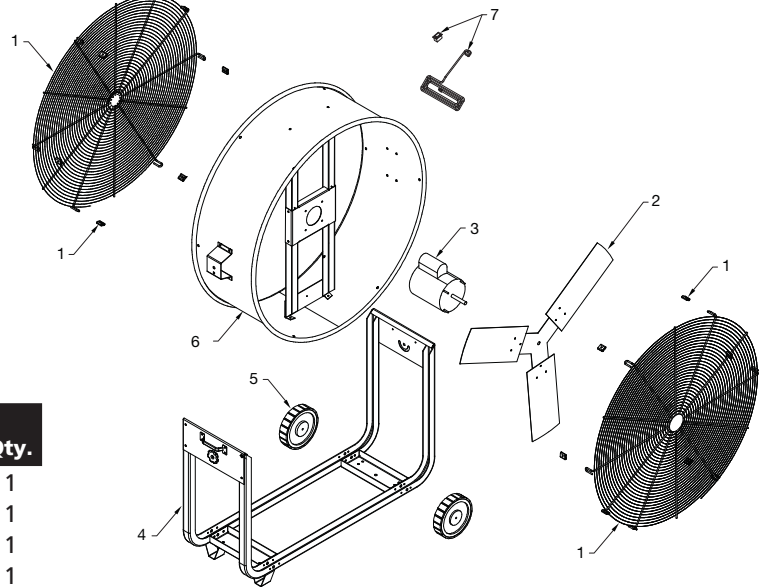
Repair Parts Illustration for Industrial Direct-Drive Mobile Air Circulator
